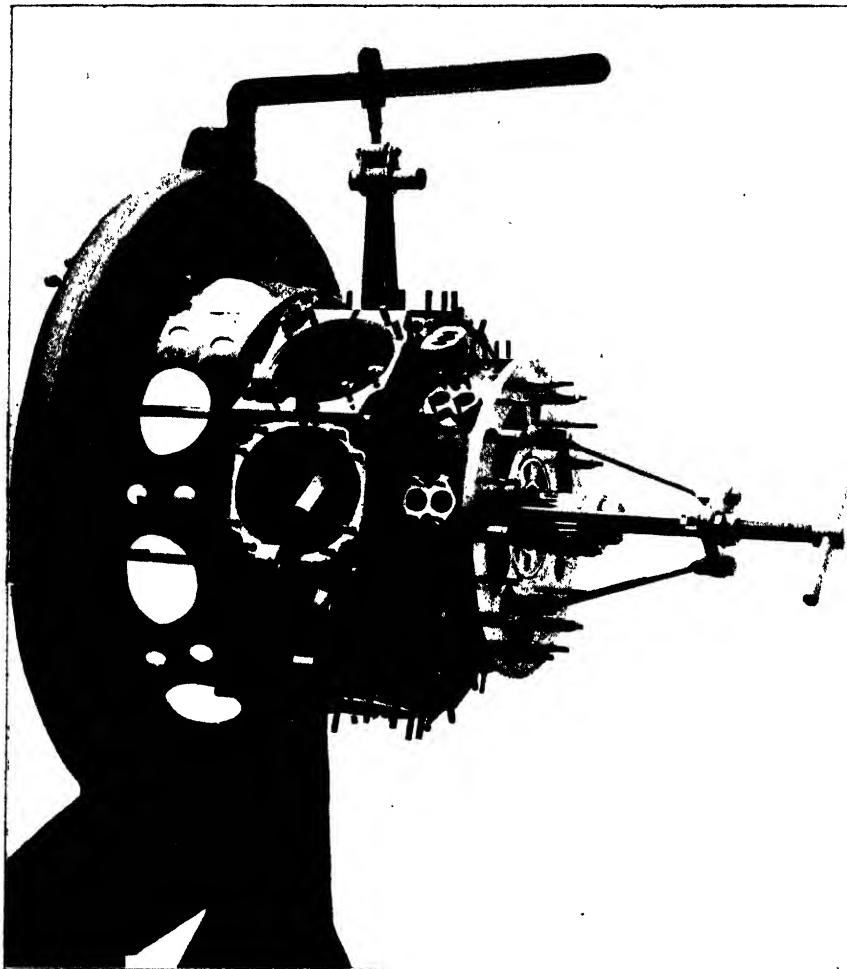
Extracting Front Half of Crankcase, showing Connecting Rod Jib.
